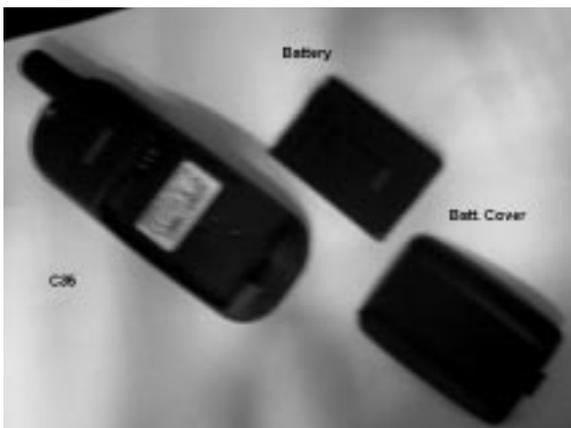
DISASSEMBLE C35 – STEP 1
